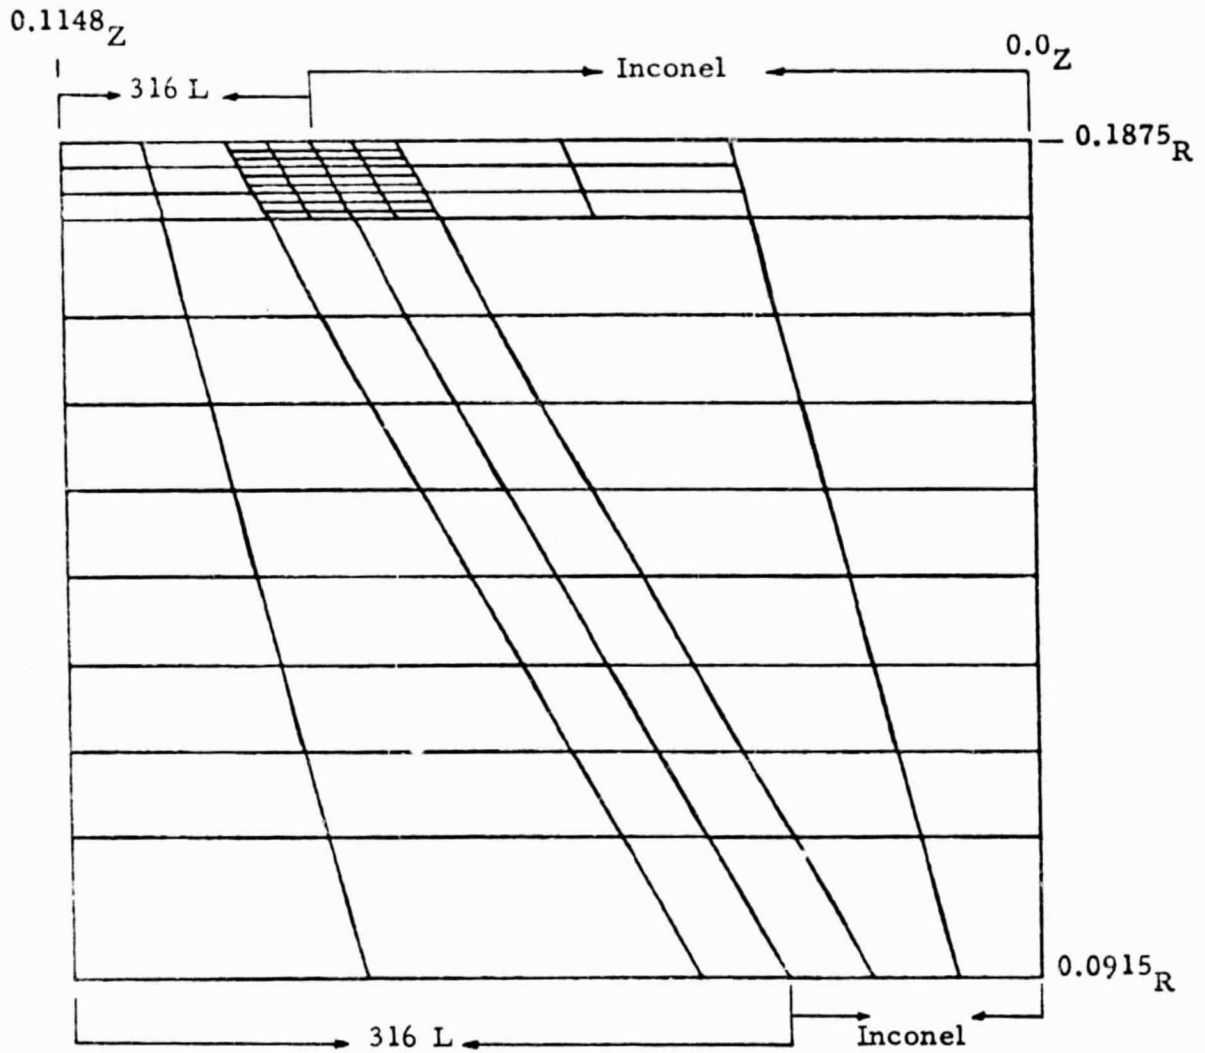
BOPACE 2-D Weld Model (Unetched)
